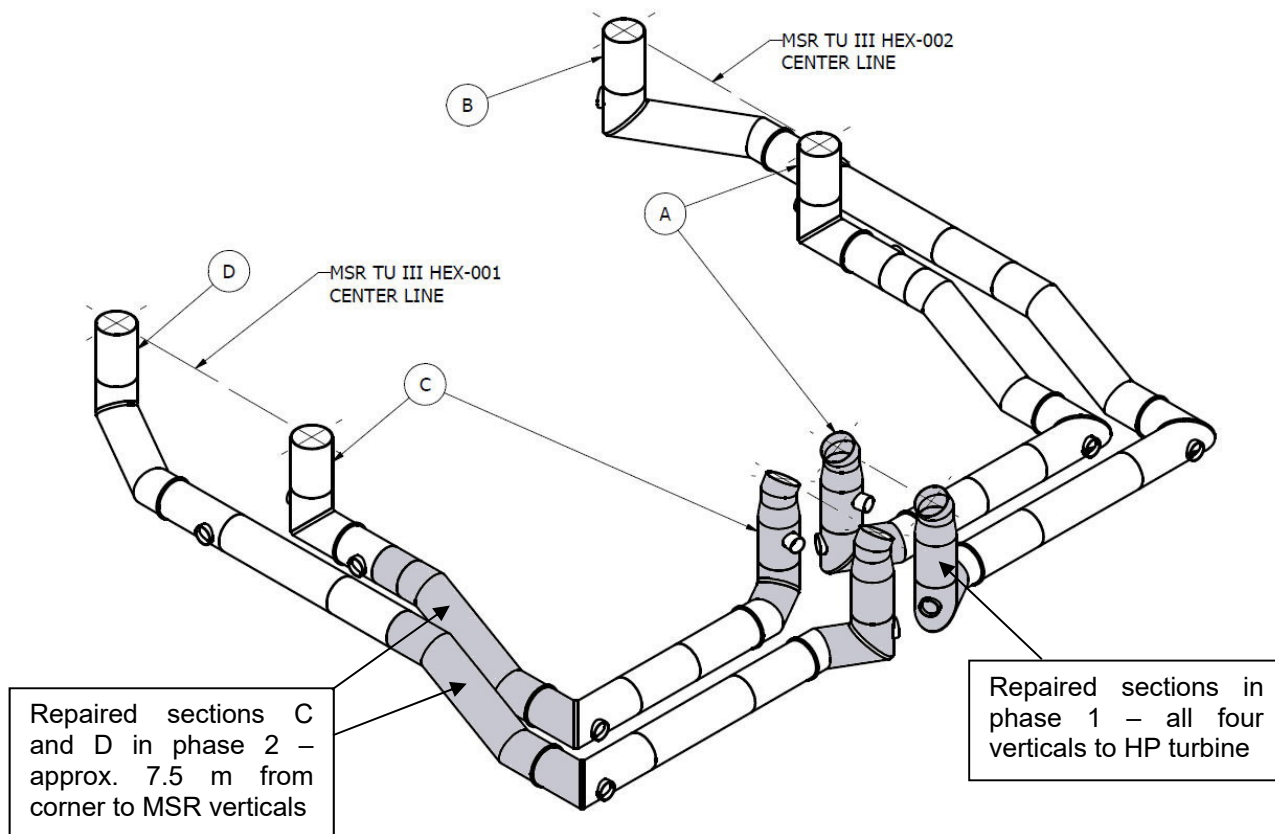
Cross Under Piping – section from drawing EDSK437563C
